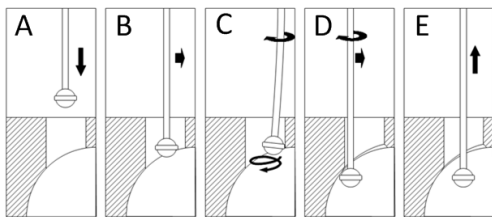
Sequence for the deburring of cross holes using the Orbitool
